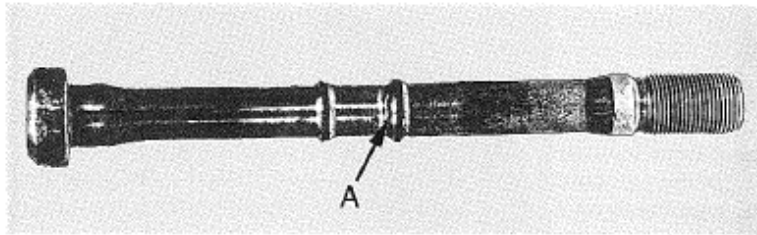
Fractured connecting rod bolt; crack initiation site at A.
